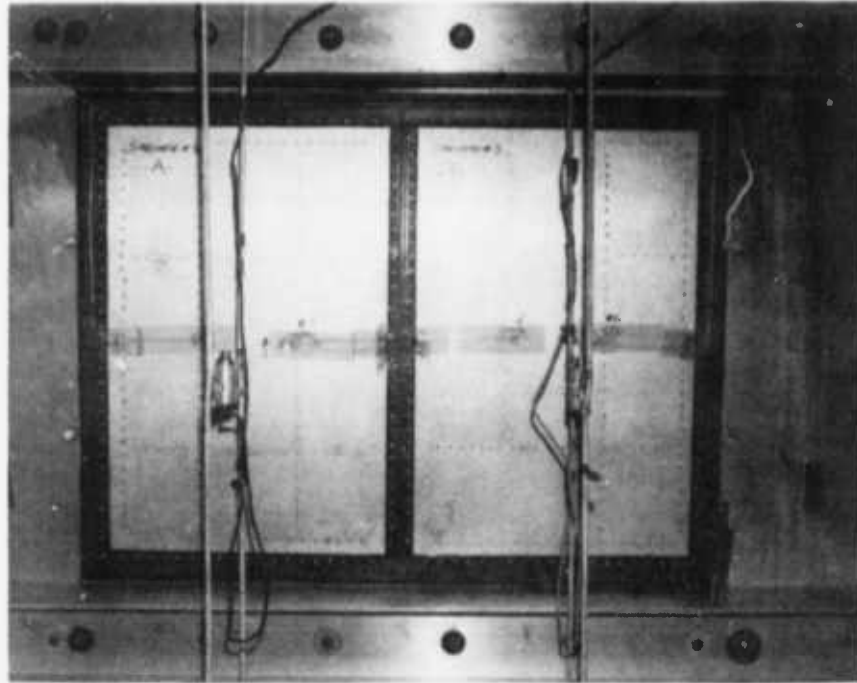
FLAT WELDBONDED SUB-SCALE SONIC FATIGUE COMPONENTS INSTALLED IN TEST FIXTURE
